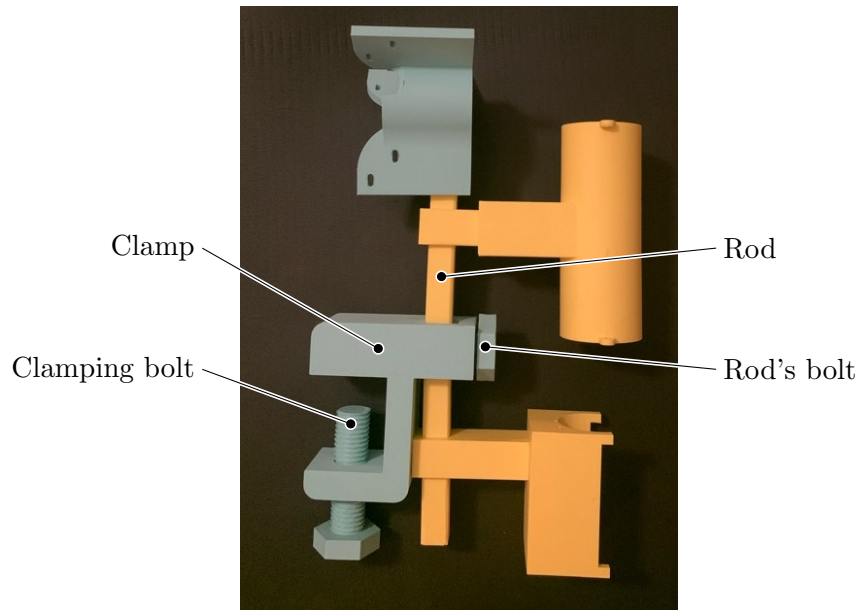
Prototype of the Fixture with its components annotated. Prototypes of other components are shown to illustrate how they would connect to the Fixture.
